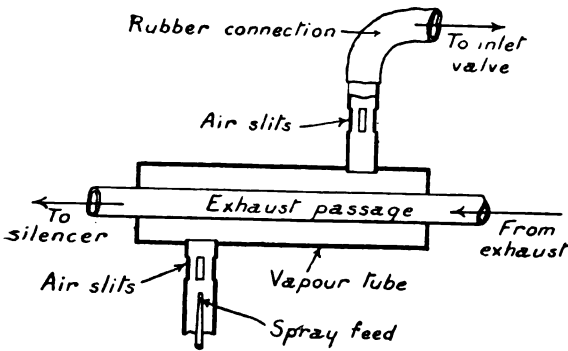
ARRANGEMENT OF VAPOURISER.
